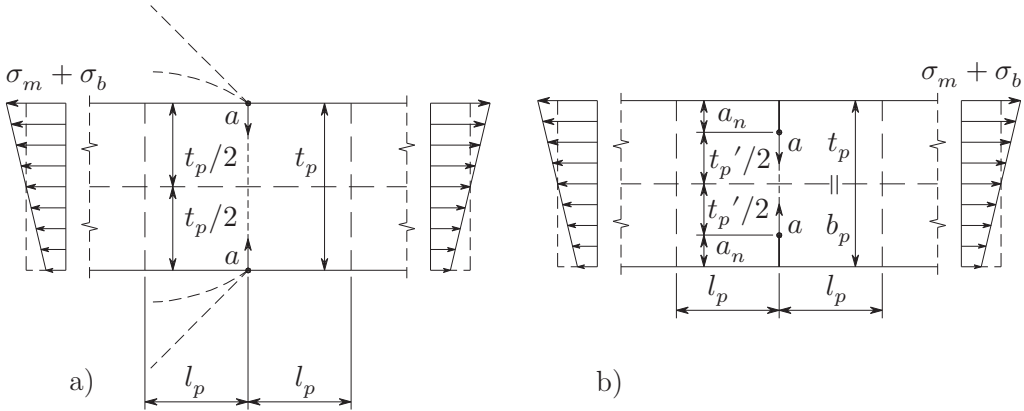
Double edge crack at a) weld toe notches and at b) root notches in crack growth specimen.
